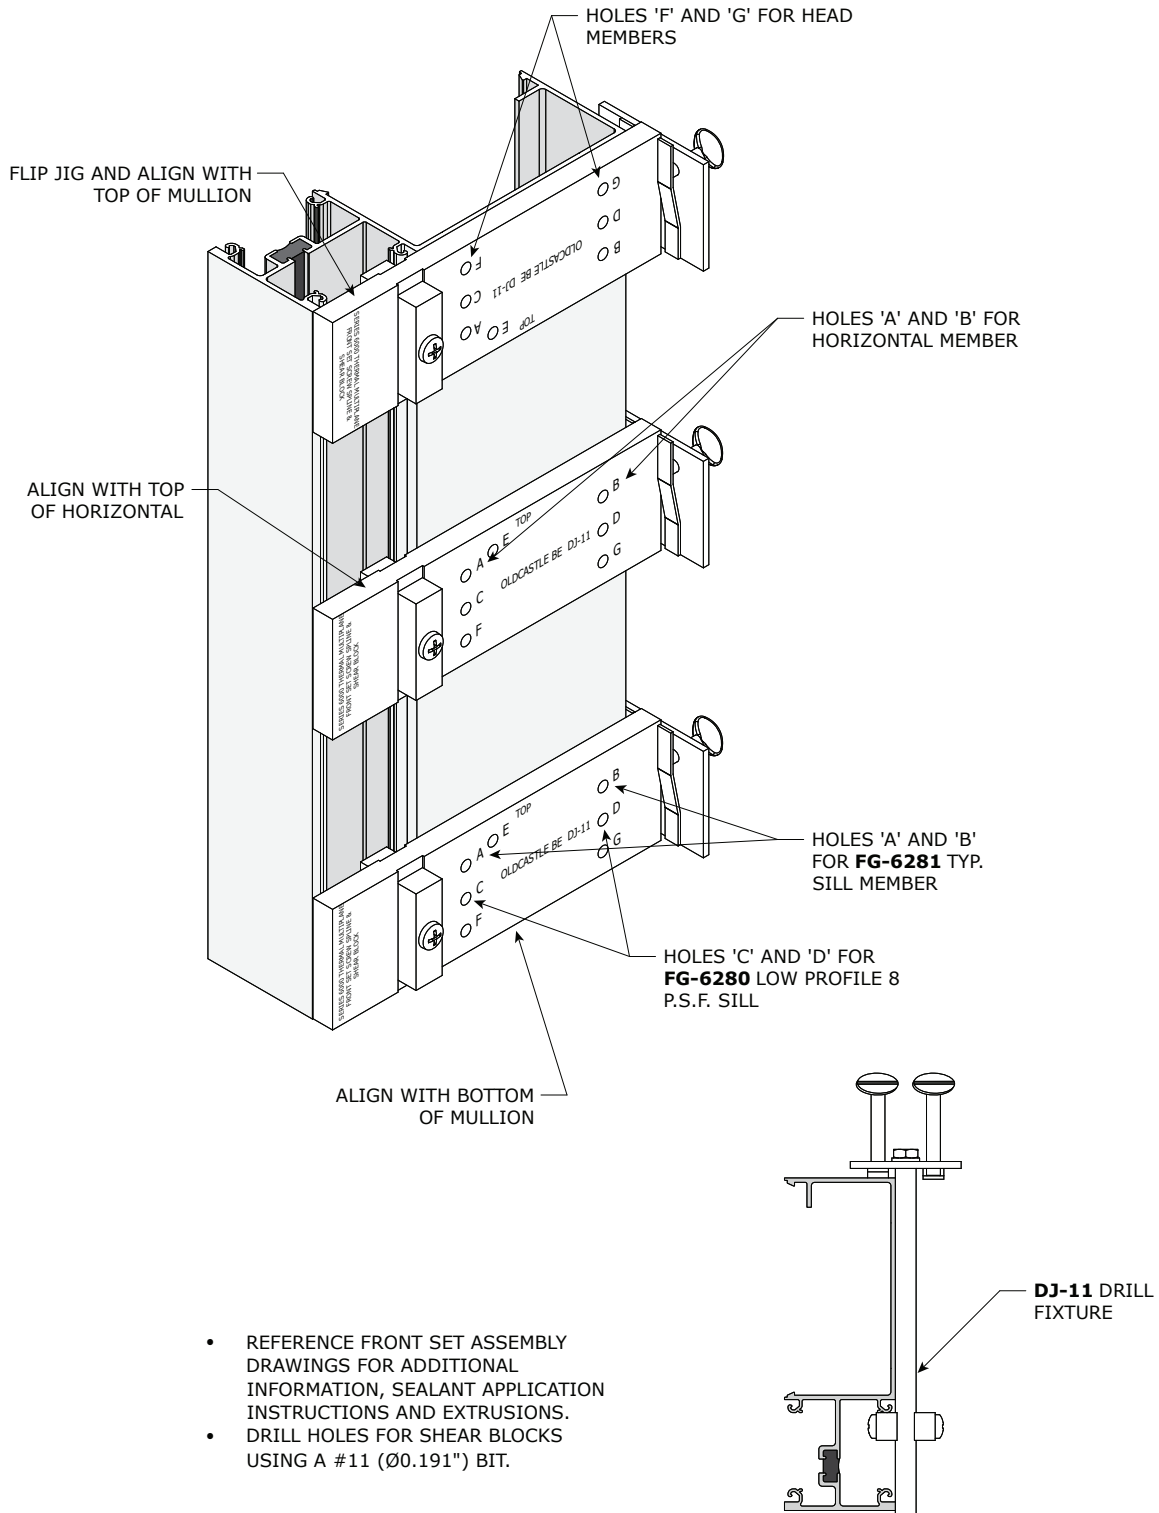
DJ-11 Drill Fixture for Front Set, Outside Glazed, Shear Block System
